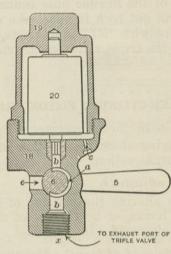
Single Pressure Weight Type Pressure-Retaining Valve.
